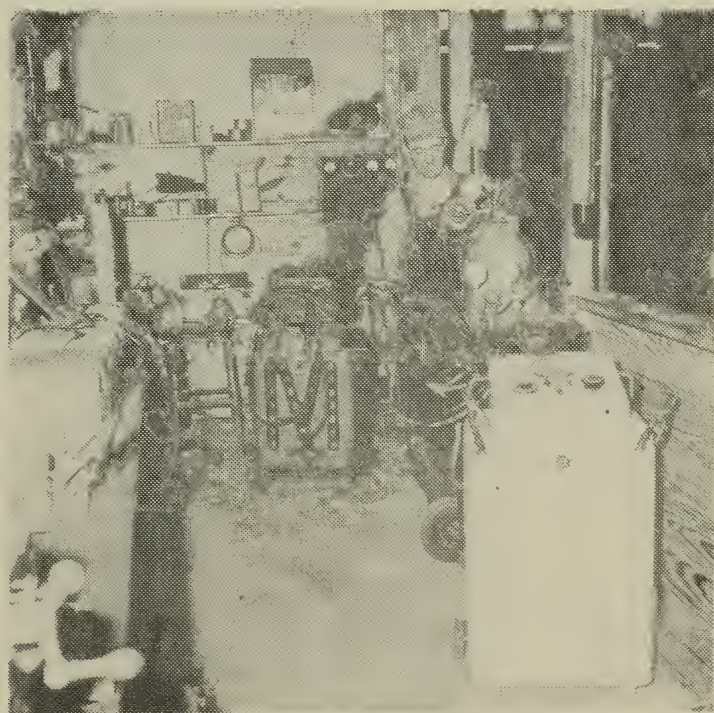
This corner of the shop is devoted to welding and magneto equipment.
